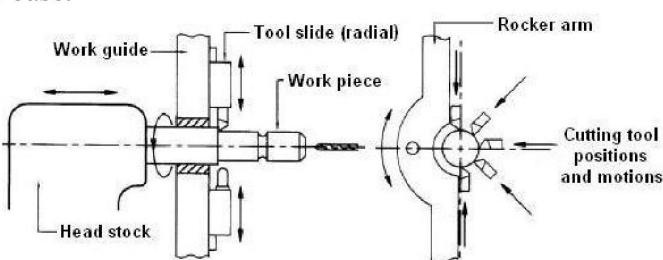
Working principle of the Swiss type automatic screw machine
